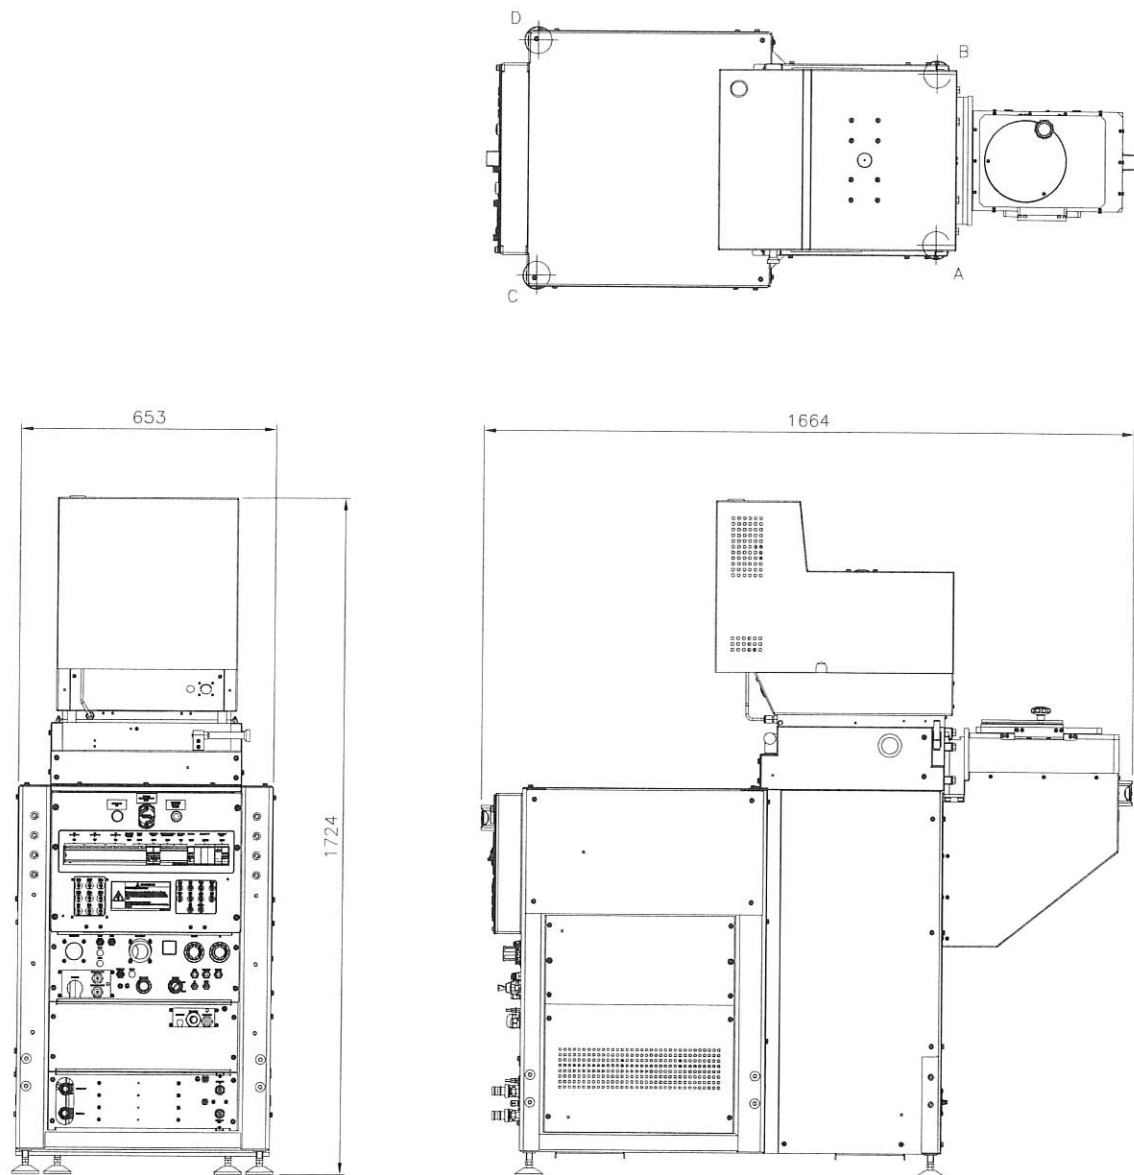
PlasmaPro®100 Cobra Tool Dimensions
